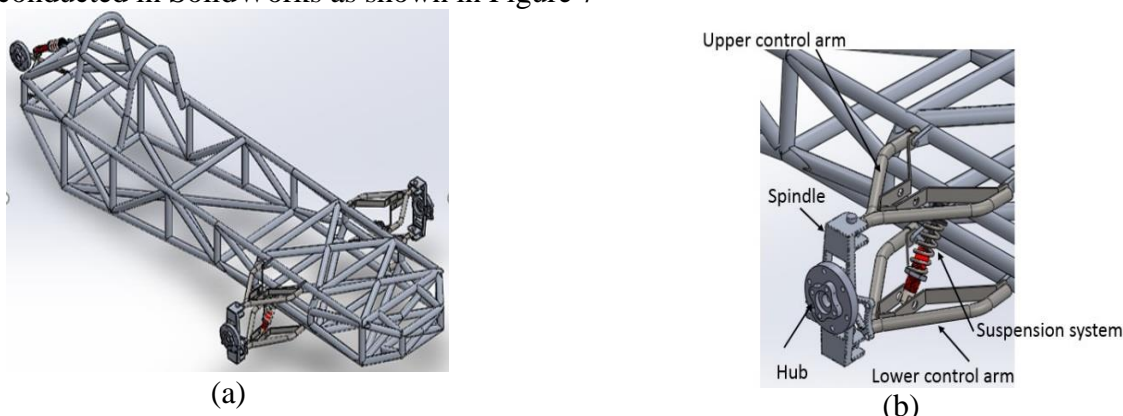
(a) Final assembly of solar car chassis and (b) suspension system assembly including hub, spindle, and upper and lower control arms.
